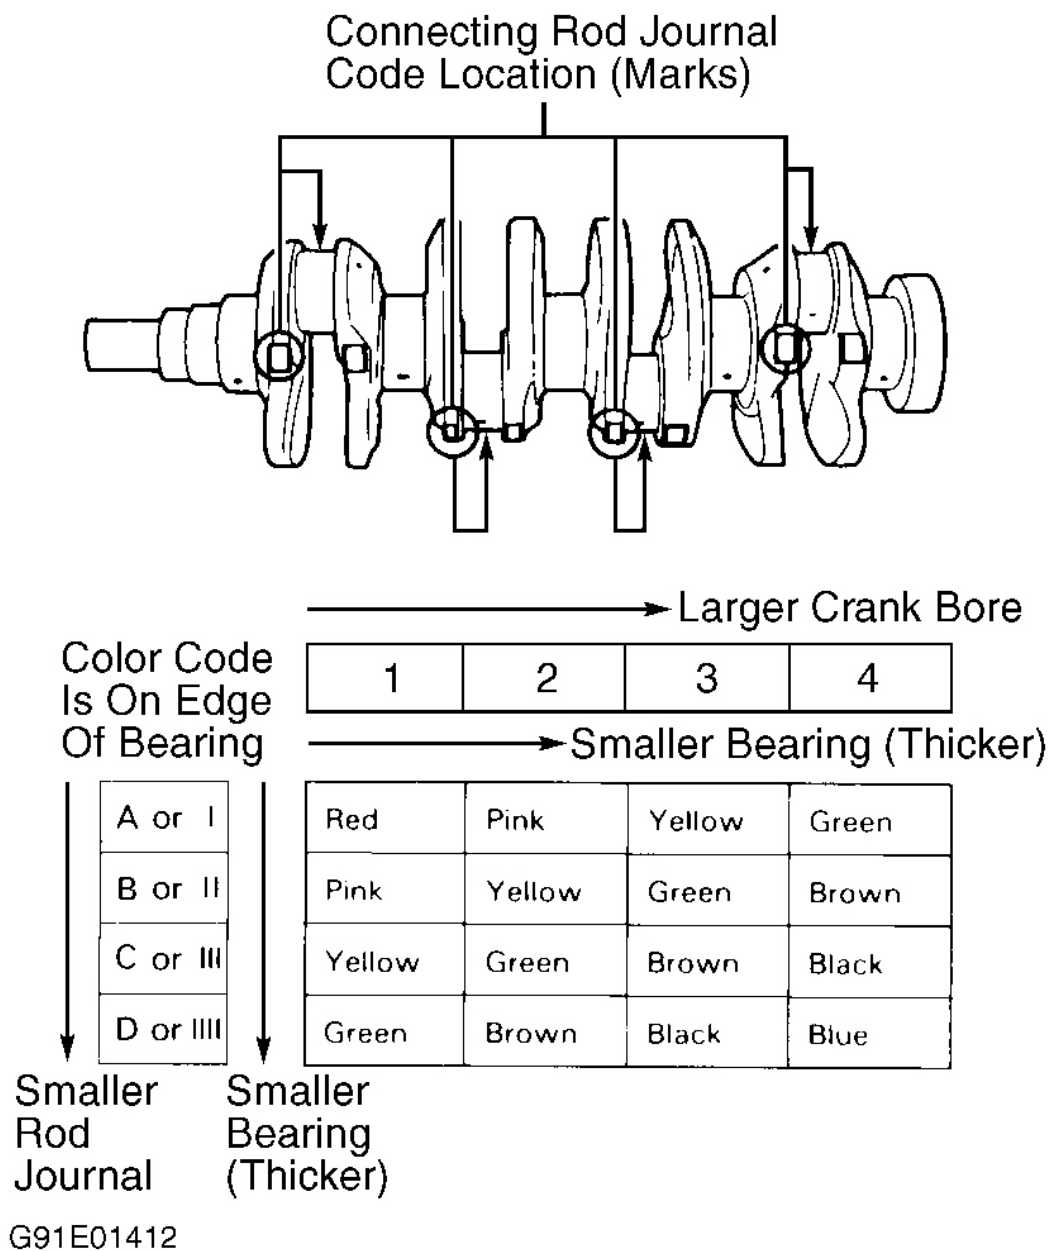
Connecting Rod Journal & Bearing Identification Codes
